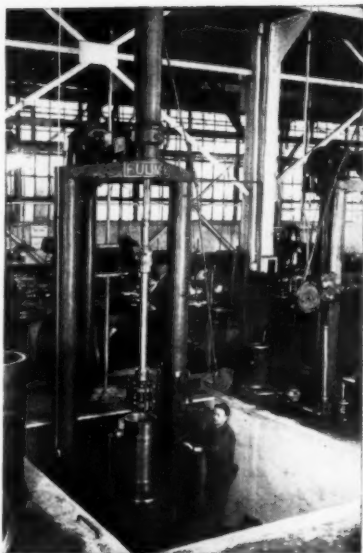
Finishing large diesel liners at the Van der Horst Corp. From .004" to .006" of pure chrome is being removed.
